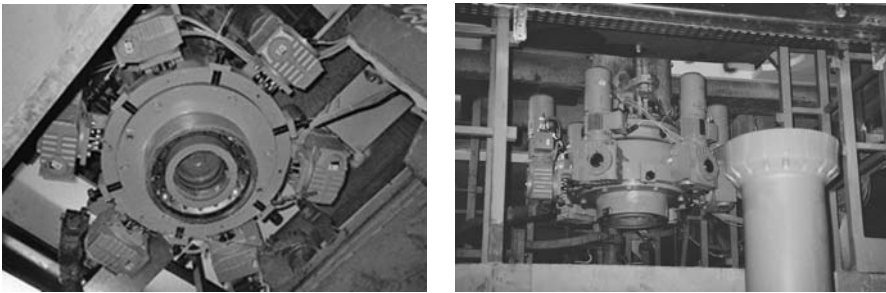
Remote-controlled, hydraulically optimized combination pressure head and die assembly for clay pipes
